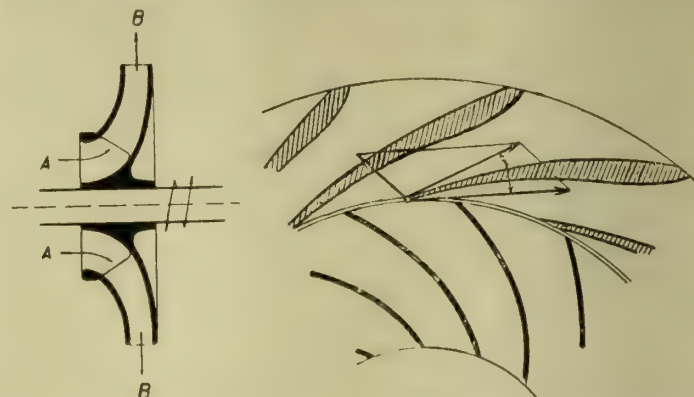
ACTION OF THE IMPELLER. FIG. 2.—IMPELLER AND GUIDE CHANNELS.
